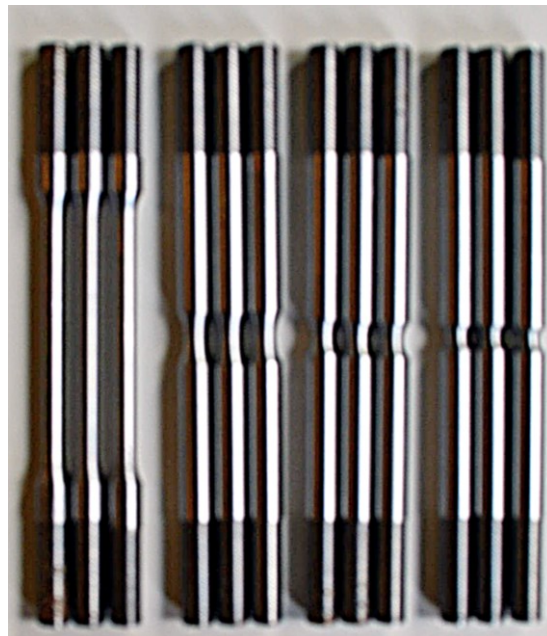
Picture of NRB specimens machined out of the pipe wall
